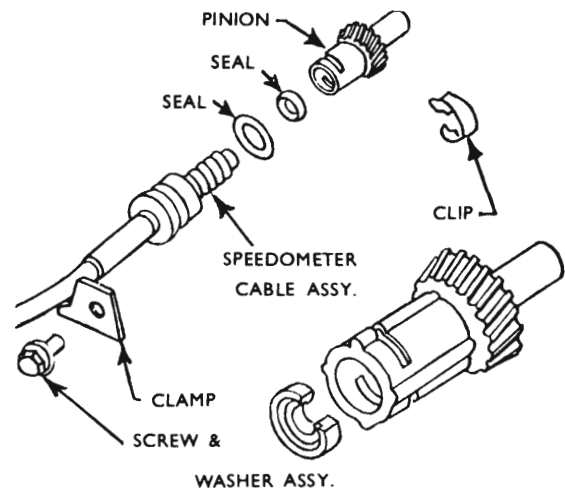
Speedometer drive pinion assembly - disassembled view
